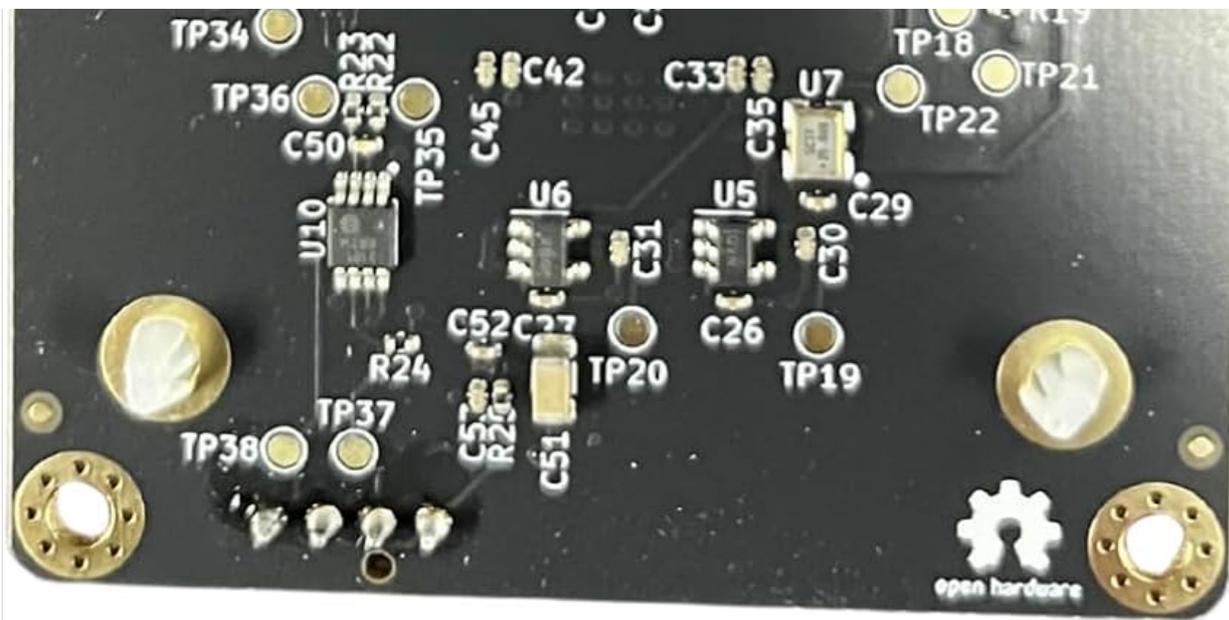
Bottom view of the Bitaxe Gamma 602 PCB, illustrating the soldering points for components like the OLED display.
